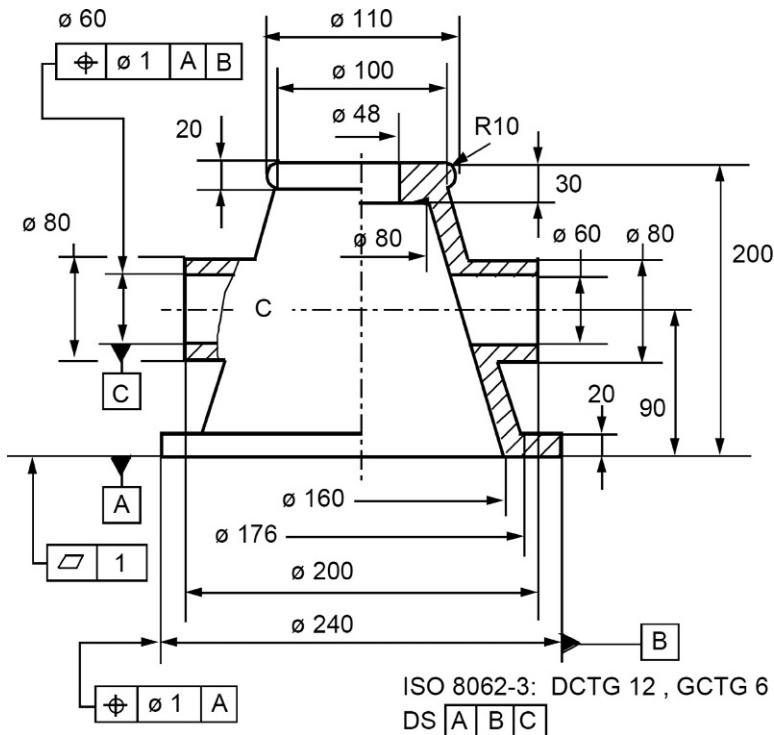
Drawing with general tolerances according to ISO 8062.3
